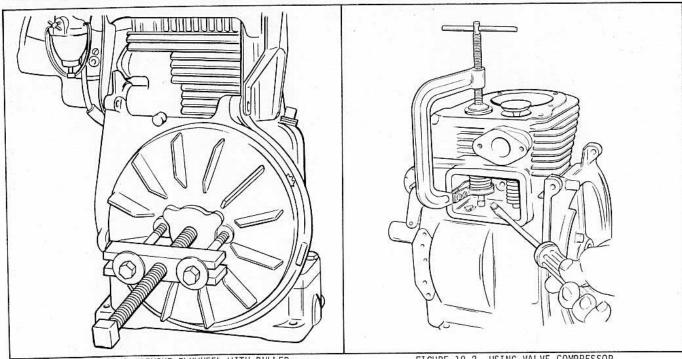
REMOVE FLYWHEEL WITH PULLER
